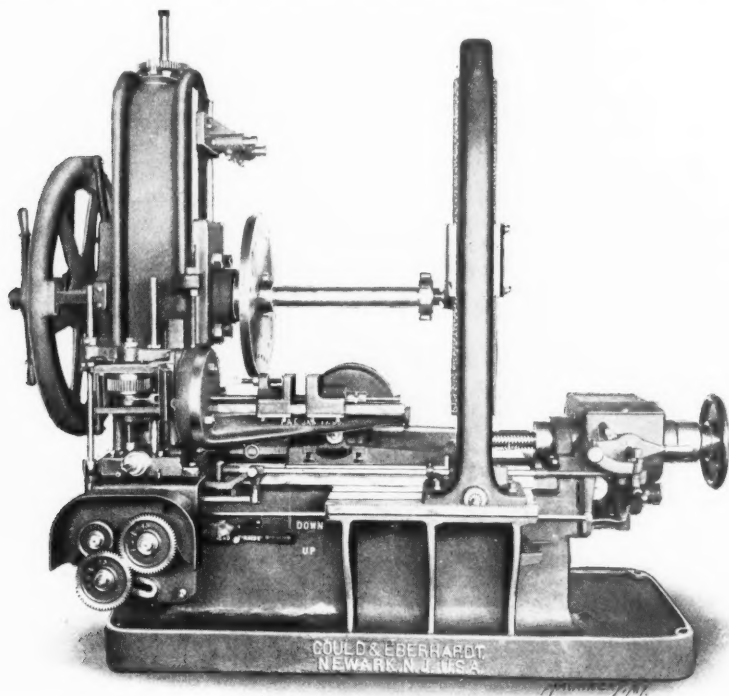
Gould & Eberhardt Spur Gear Machine, with Special Automatic Rim Clamping Device Attached.
